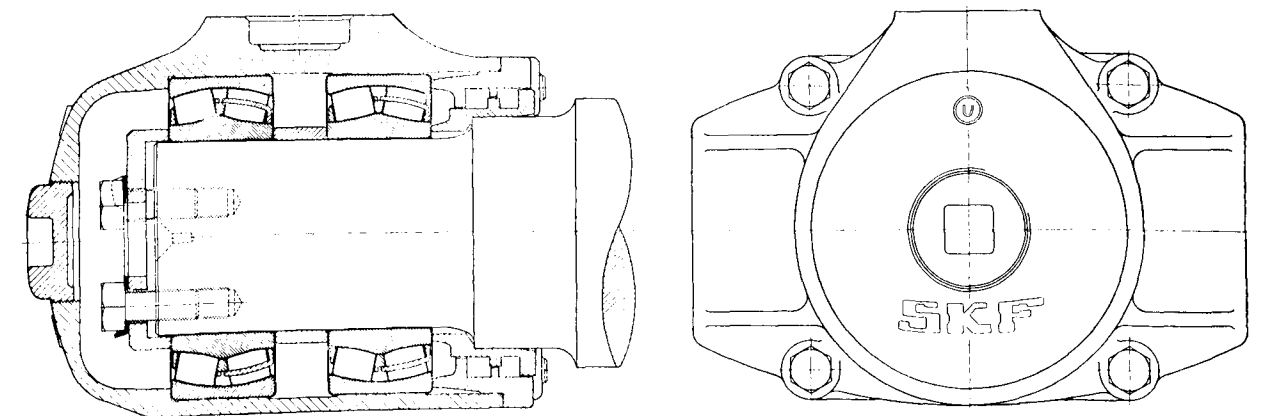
Goods wagon axlebox with spherical roller bearings of type shown in Fig. 4. U.I.C. 130 mm. journal.
